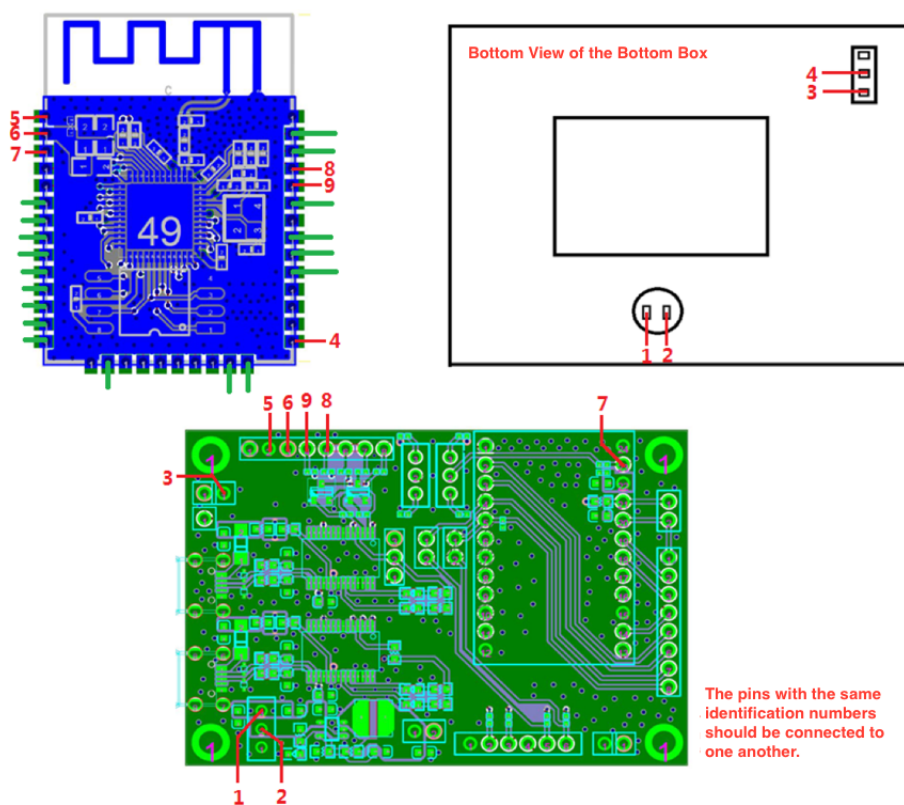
The Wiring of the ESP32-WROOM-32 Fixture
